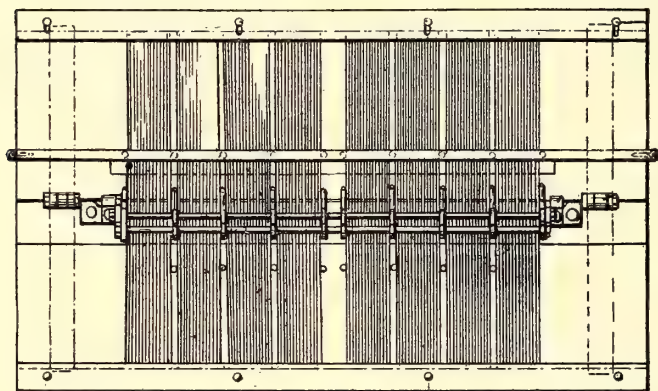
SECTION FRAME AND REEDS IN POSITION ON TABLE
